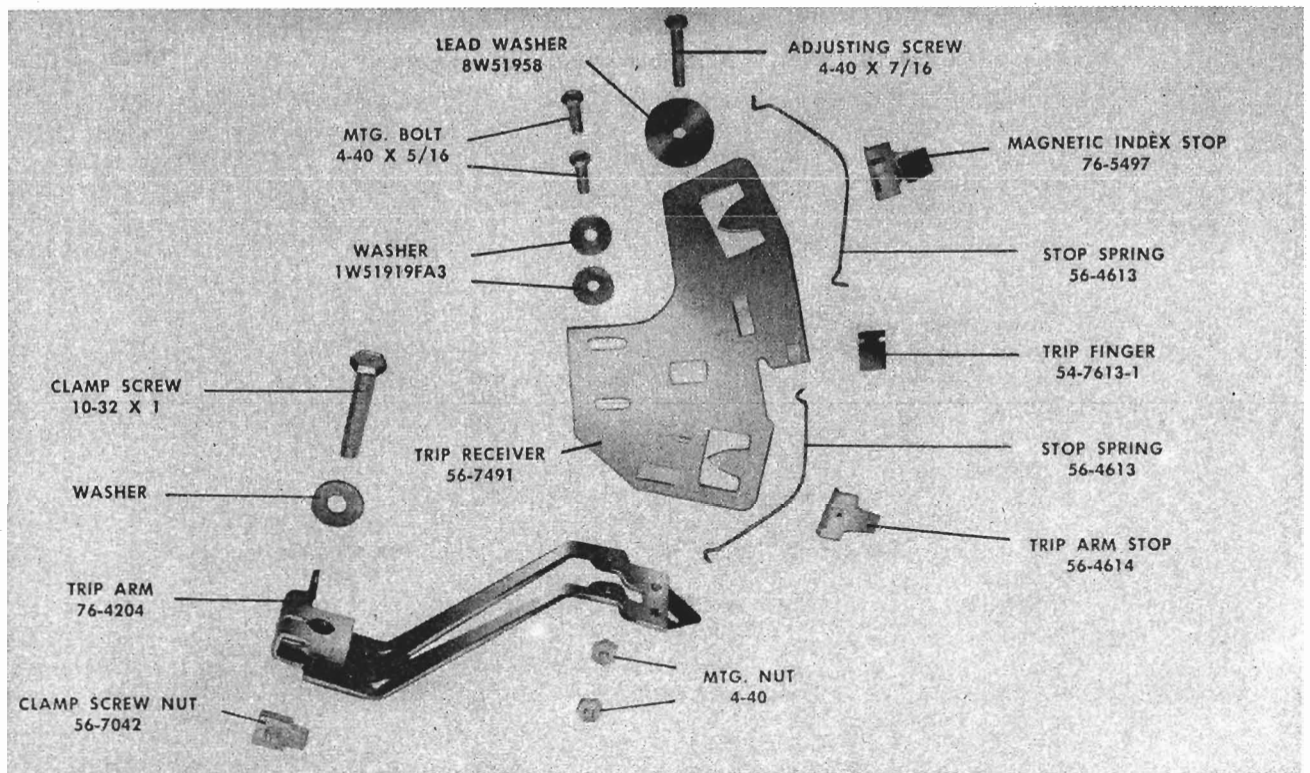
TRIP-ARM AND TRIP-RECEIVER ASSEMBLIES
